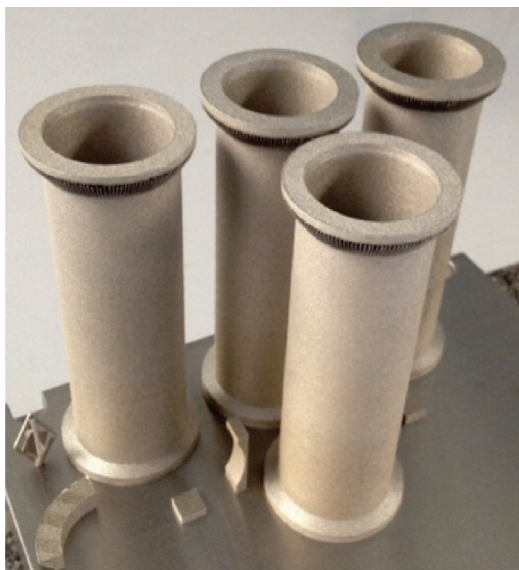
Additive manufactured DN40KF tubes for vacuum tests. [39]
